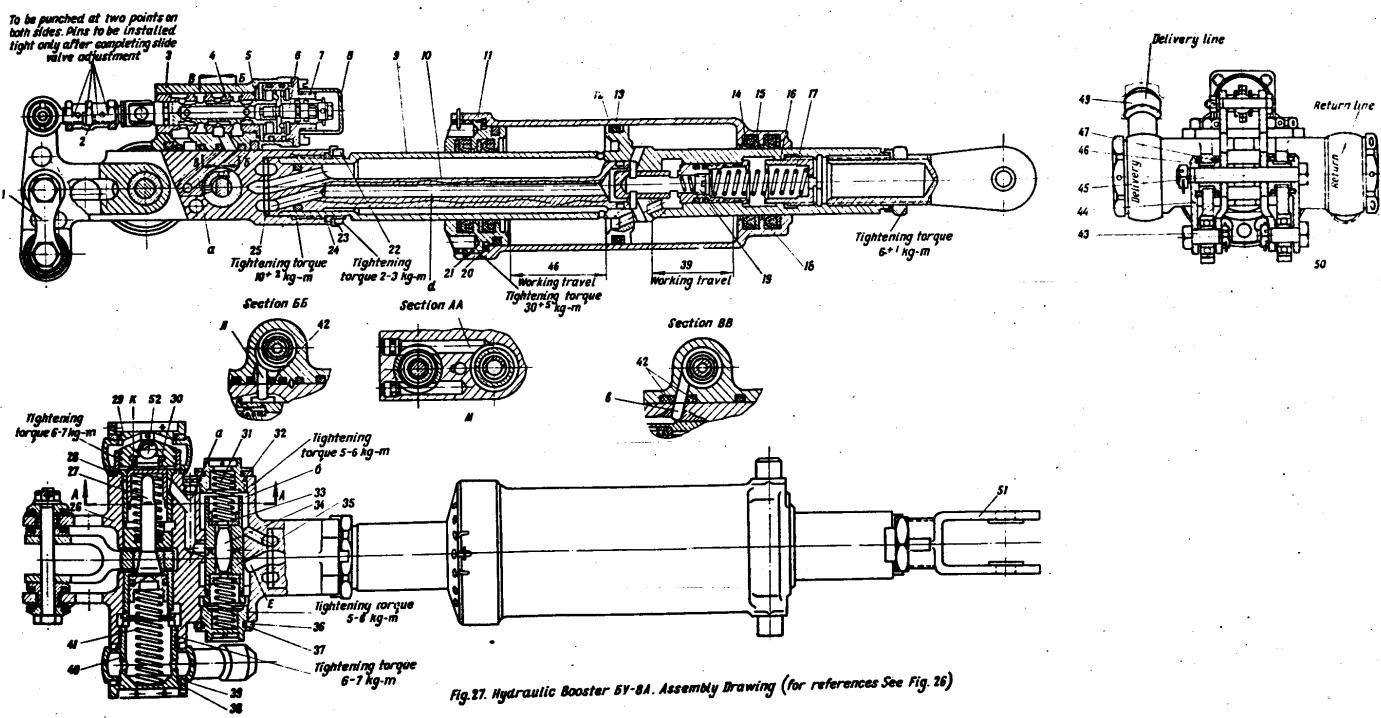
Hydraulic Booster 5Y-8A. Assembly Drawing (for references See Fig. 26)
